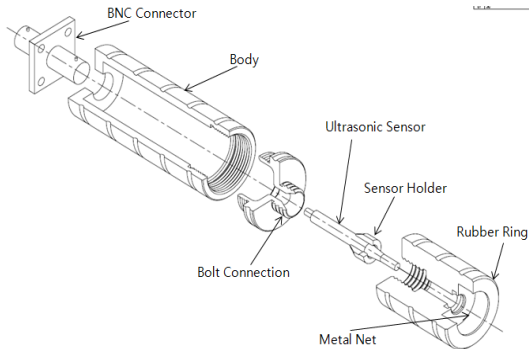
Layout of improved ultrasonic sensor for cylinder head
